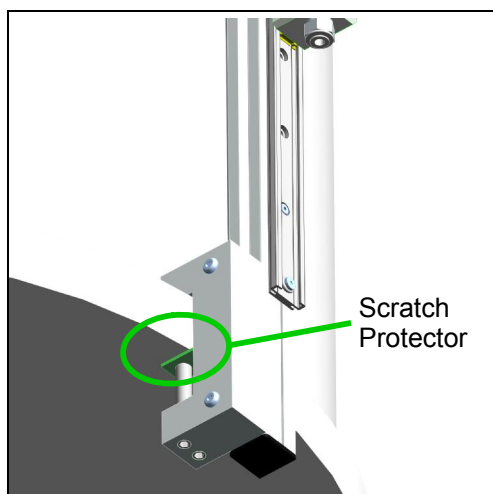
Mounting Clamp attached to the Magnet Ring
